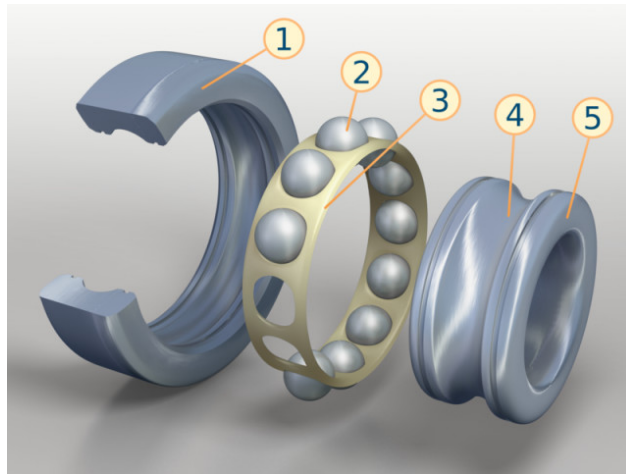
Exploded view of a rolling bearing. 1: outer race or ring, 2: balls or roller elements, 3: cage, 4 and 5: inner race or ring.
